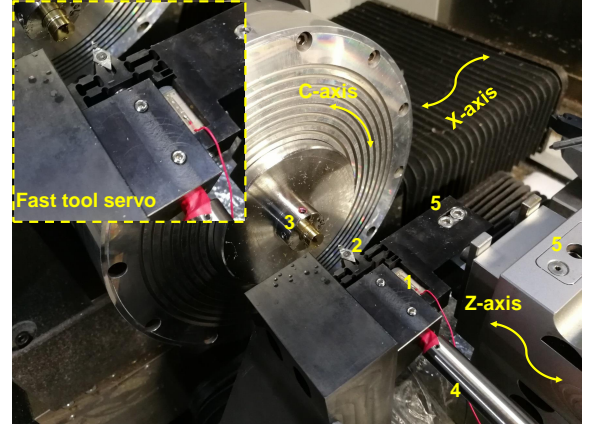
Photograph of the CTS diamond turning system. 1. piezo-actuator; 2. diamond tool; 3. workpiece; 4. capacitive sensor probe; 5. tool holder.
